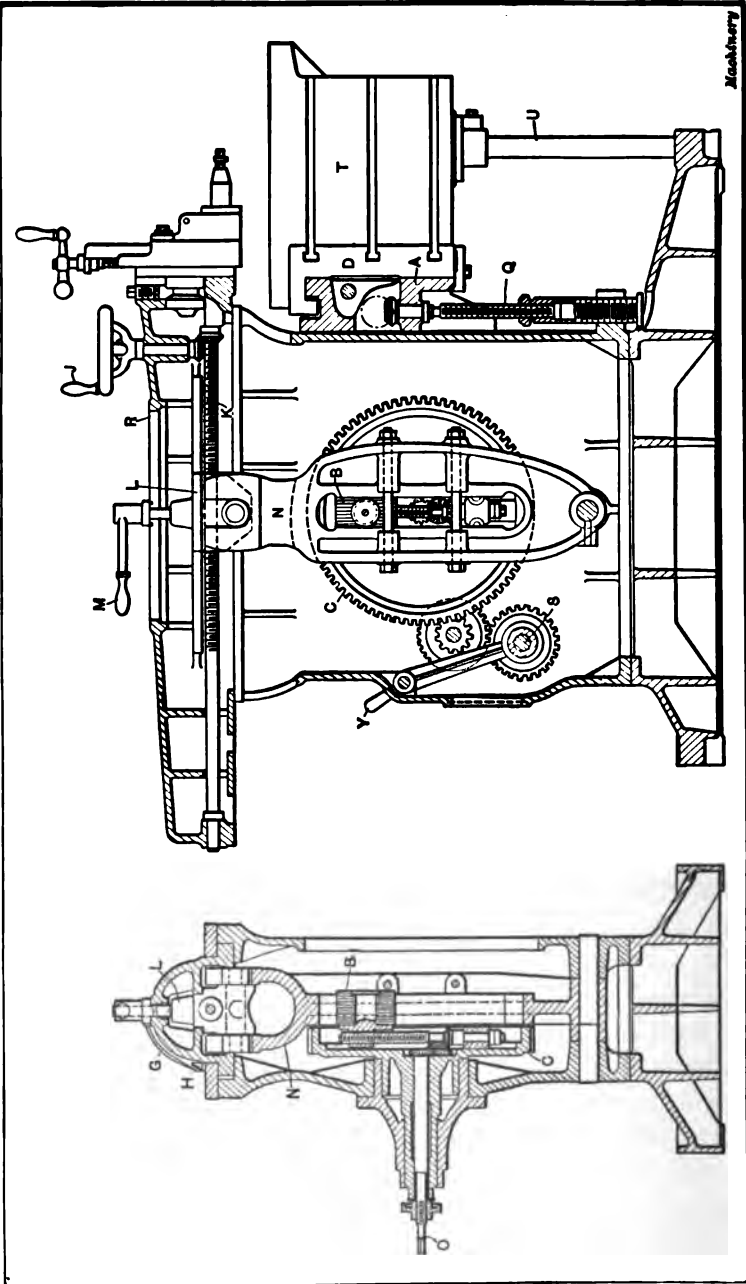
Longitudinal and Cross-sections of Back-gear Crank-shaper
